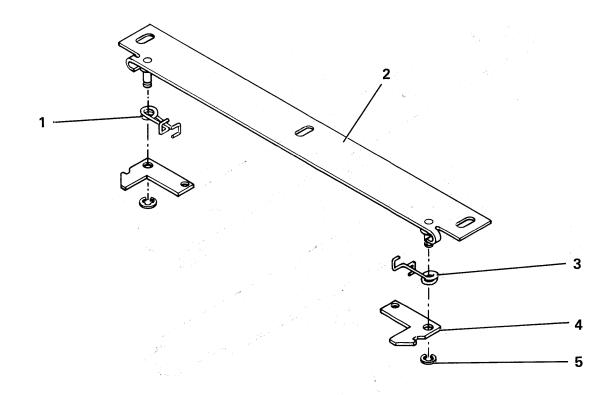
LATCH ASSEMBLY. SEE LIST 6.
